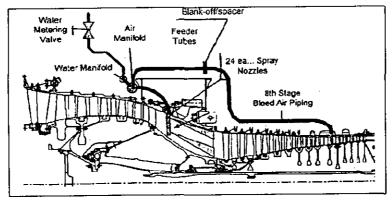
Half Section View of LM6000 Gas Turbine Compressor Section 3
